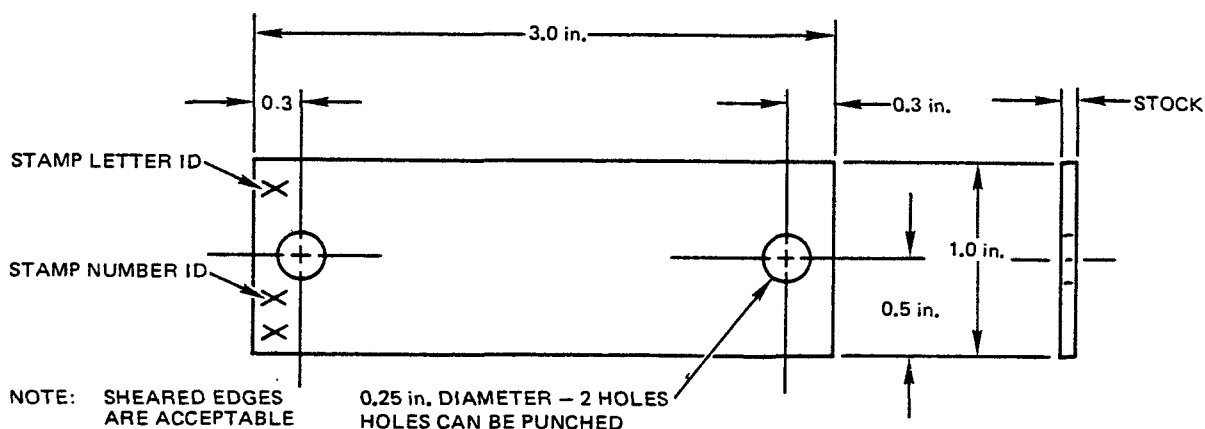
EVTM Grapple Chain Tape Test Fixture Layout
